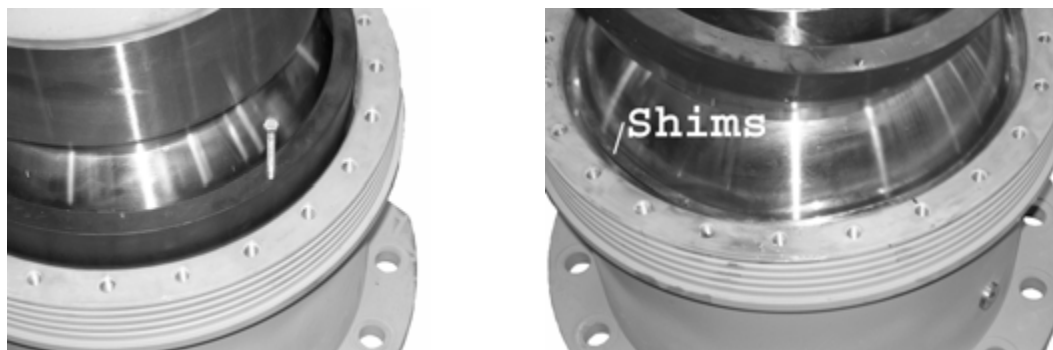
Remove the Retainer or *Wear Sleeve* (left), and Install Packing Shim Pack (right)
